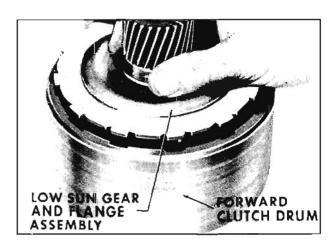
Installing Low Sun Gear and Flange Assembly
